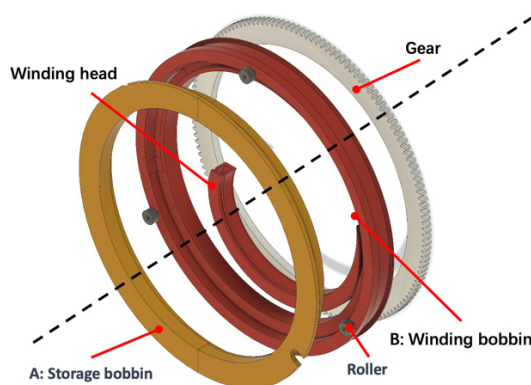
Schematic illustration of a REBCO wire storage bobbin (A) separated from a winding head (B).
